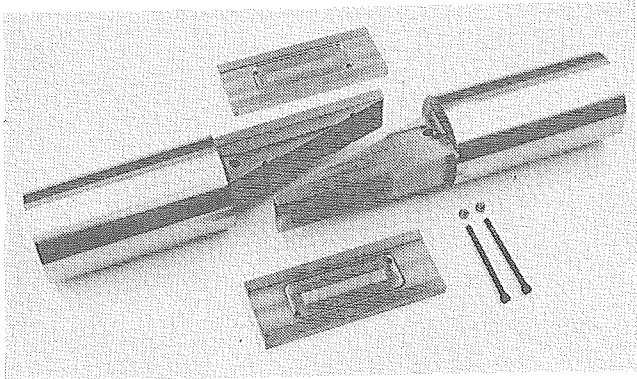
Parts of an Electron Beam Welded Balance
